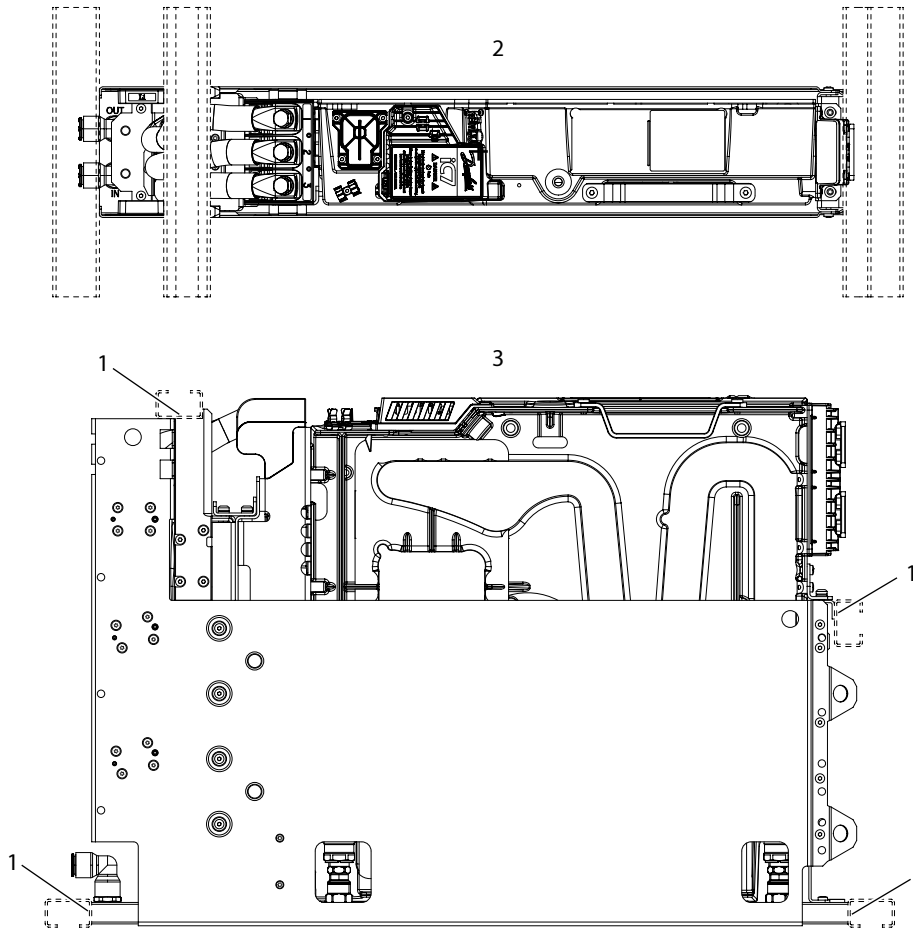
Mounting Holes of the System Module with the Integration Unit in Horizontal Position
